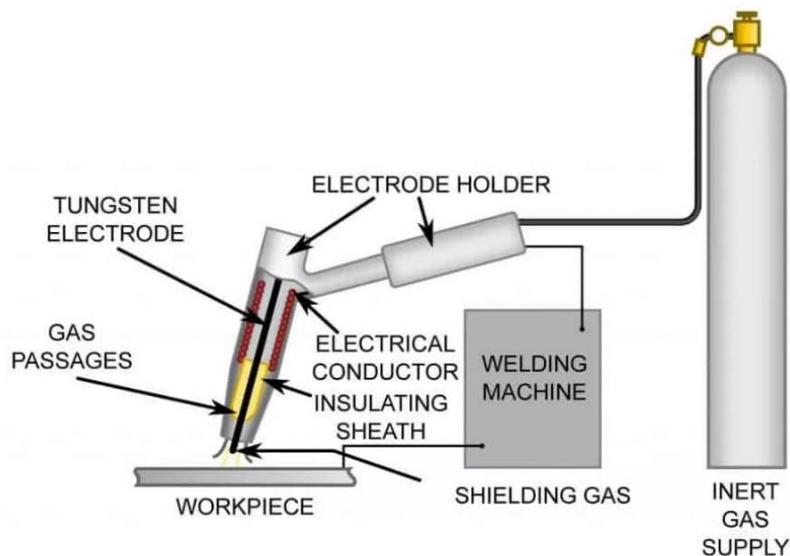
Working principle of TIG welding machinery. (www.weldingpros.net)
